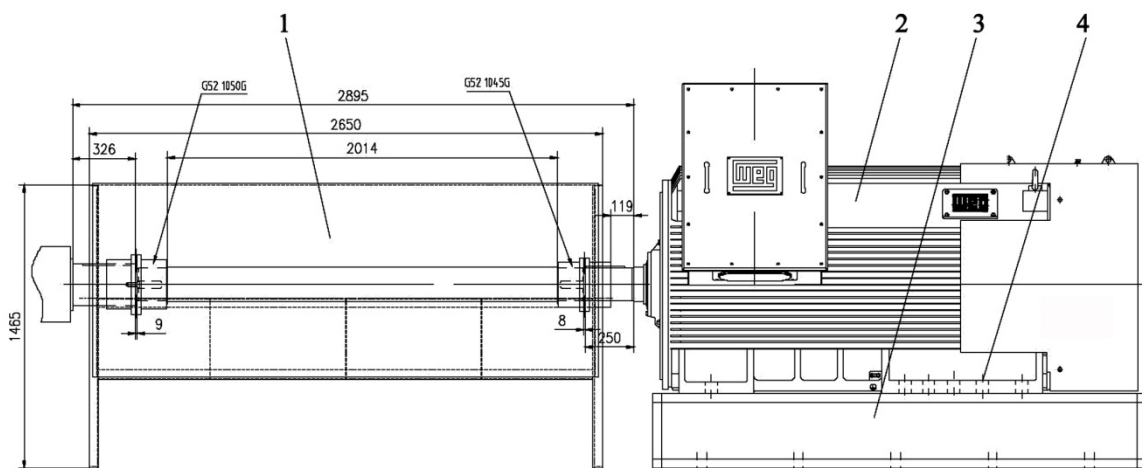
Installation drawing for motor unit (PXZ-1500II)
